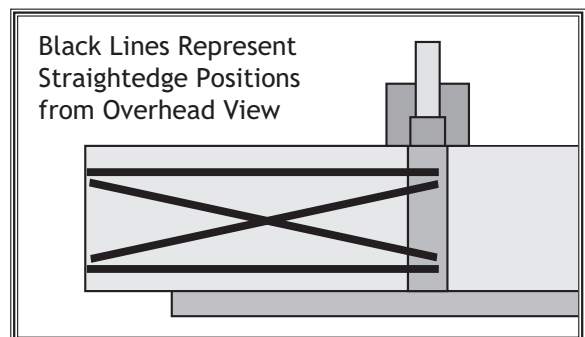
Straightedge positions for verifying outfeed table parallelism.
